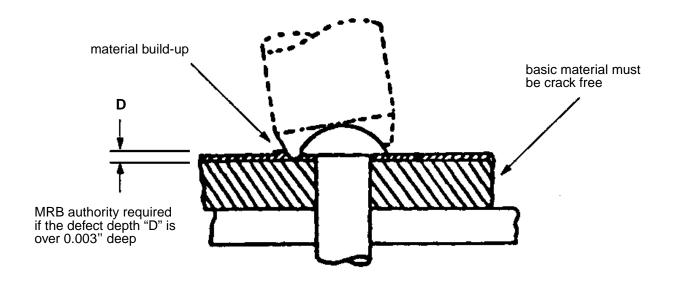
SNAP MARK DAMAGE AROUND UNIVERSAL HEAD RIVETS
